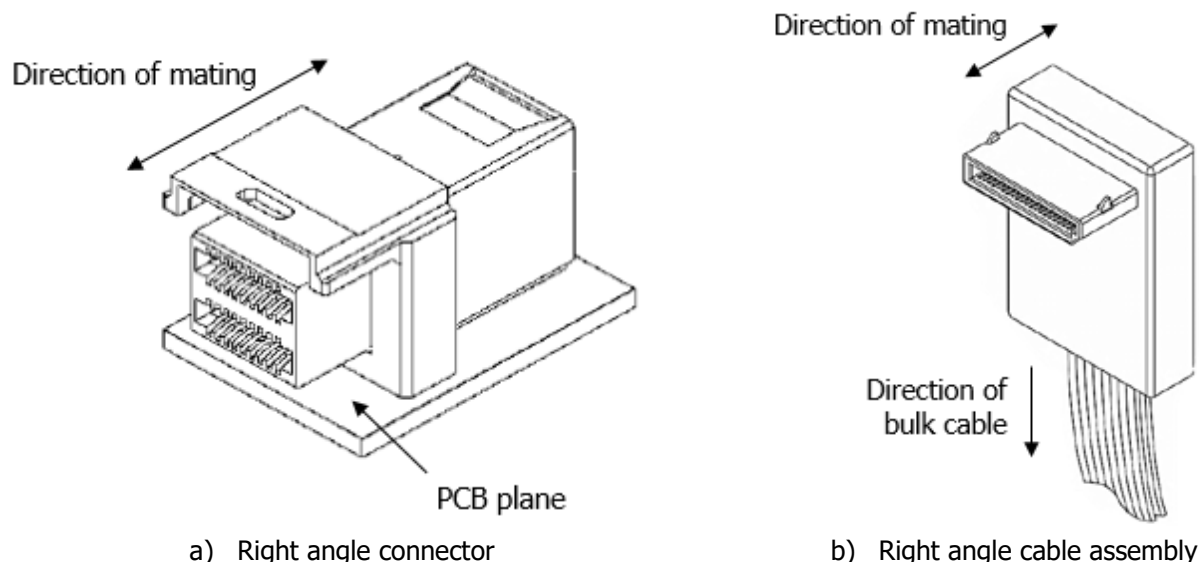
Representative Generic Right Angle Connector and Cable Assembly
